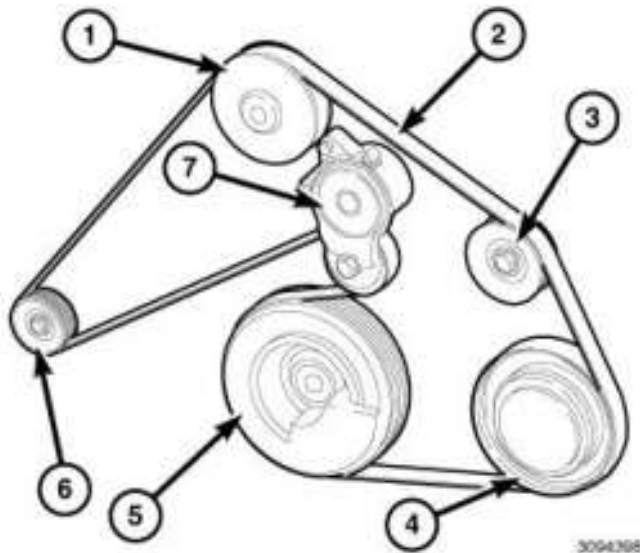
Pulleys, Tensioner & Drive Belt Routing 3.0L
